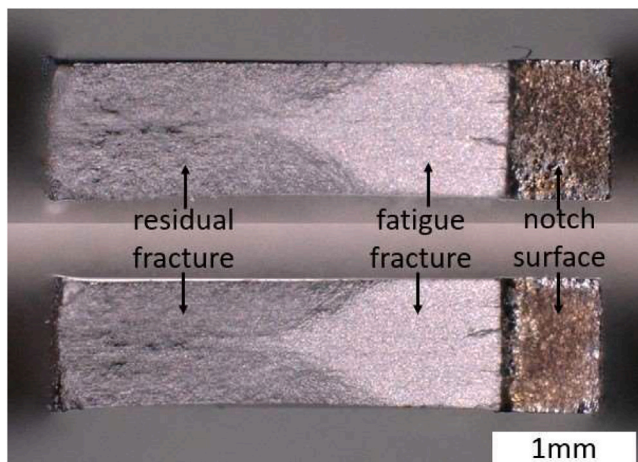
Fracture surfaces of the second fatigue specimen (Mag. 50 x).
